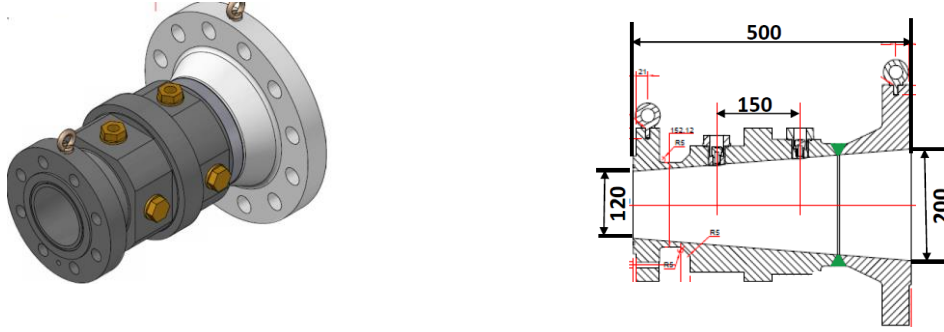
The adapters used for plate specimen: cylindrical (top) and conical (bottom). The dimensions are given in mm.
